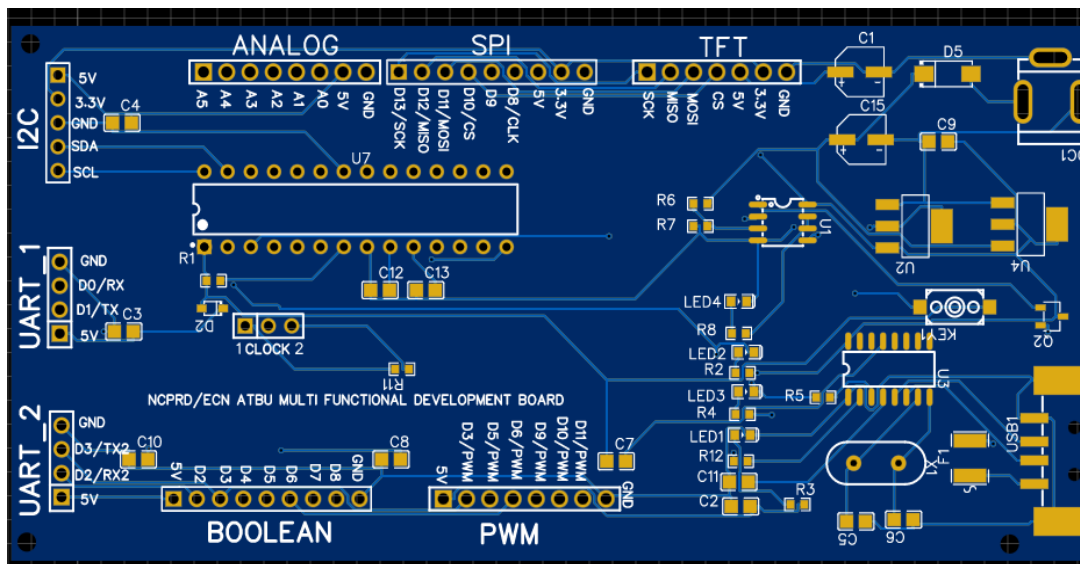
Double Face PCB Schematic Design for the novel Development Board using ISIS
